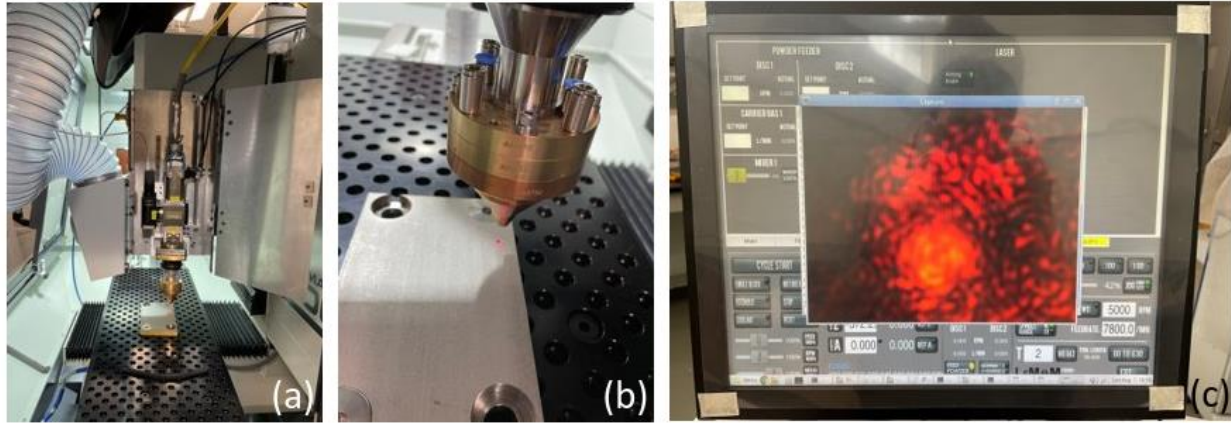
(a) AAMS deposition head in printing with 2mW laser activated. (b) Zoomed view of the deposition nozzle, build plate, and laser spot. (3) The in-situ capture of the laser spot using a co-axial camera.
